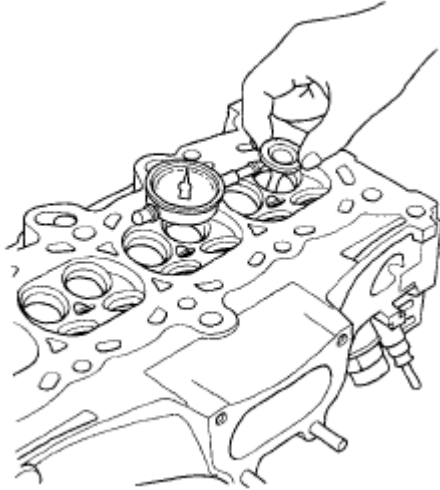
Checking Intake Valve Stem-To-Guide Clearance
